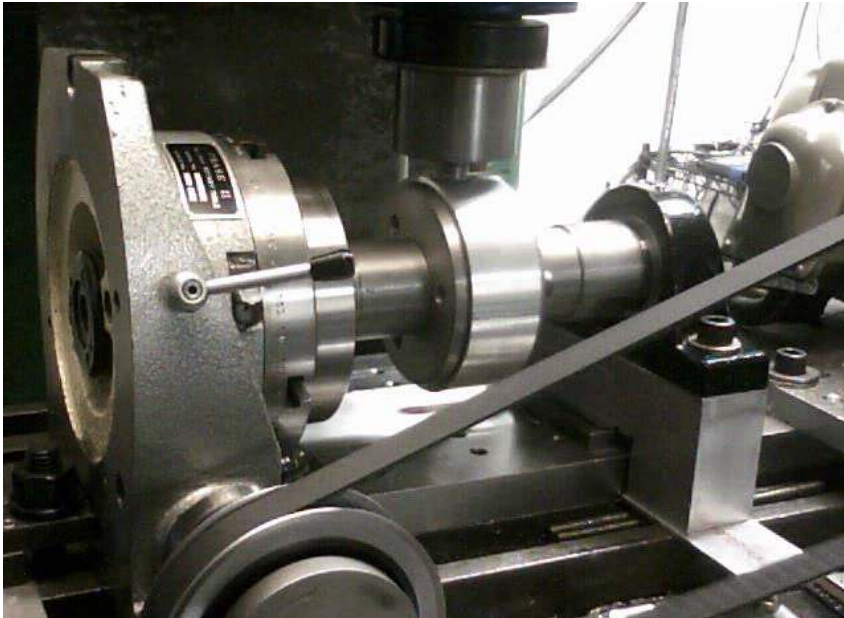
The rotary welding apparatus used in this experiment is mounted to a standard FSW machine and rotates butted pipe sections below a stationary tool axis.
